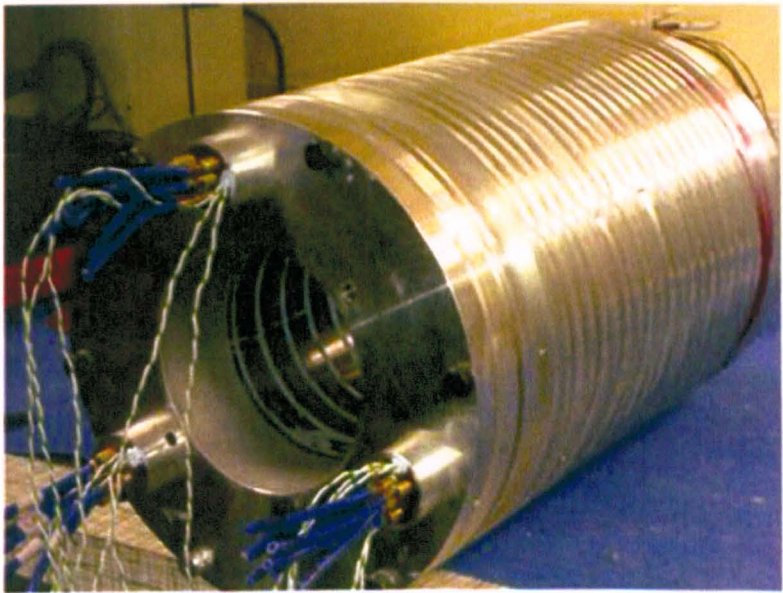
TLPM motor: final stator assembly with water-jacket
